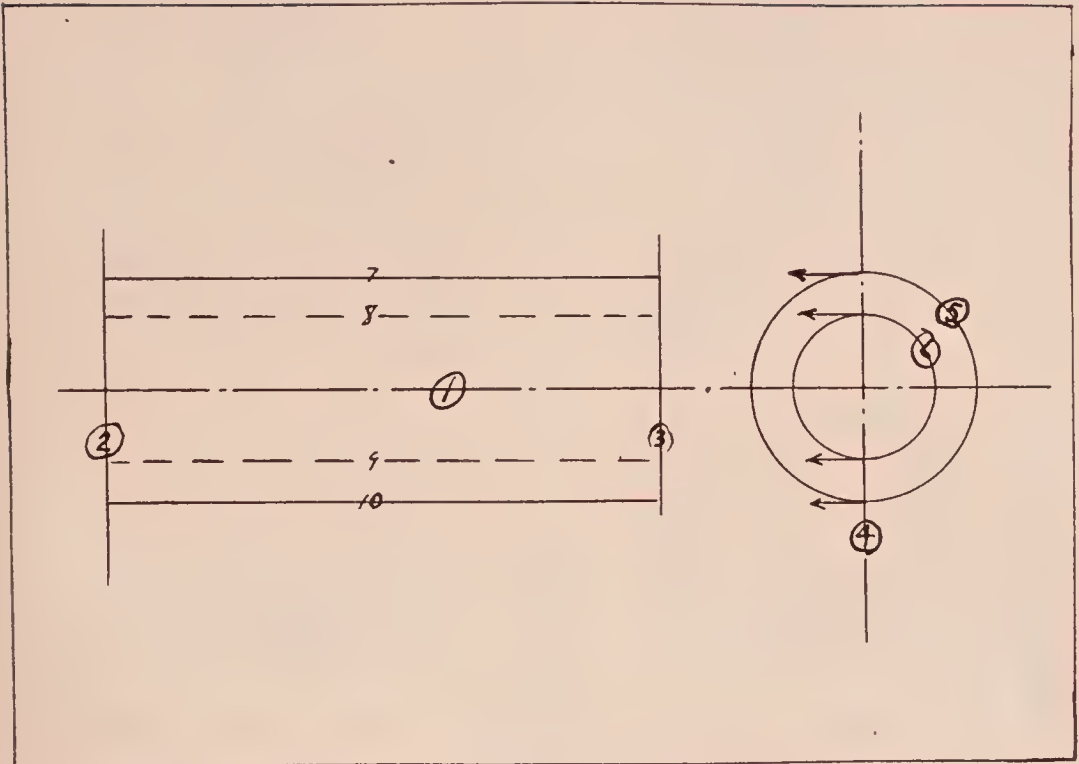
Order of drawing lines of drawing of a hollow cylinder.
